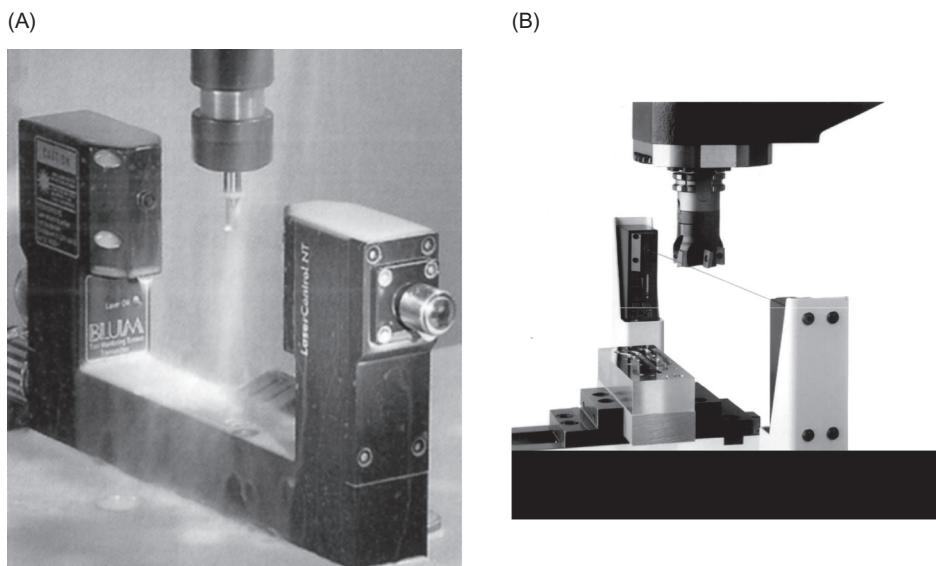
Laser system for monitoring of tool breakage (A) and optical presetting of cutting tool (B) [25,28]. From Blum LMT and Renishaw.
